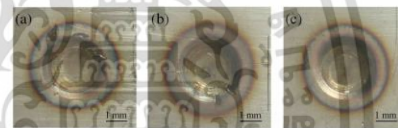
Appearances of the welded joints of SUS316 and SUS425 by all of UT R16 and LT different electrode shapes on SUS316 side (a) UT R16 - LT flat, (b) UT R16 - LT R16, (c) UT R16 - LT R30
